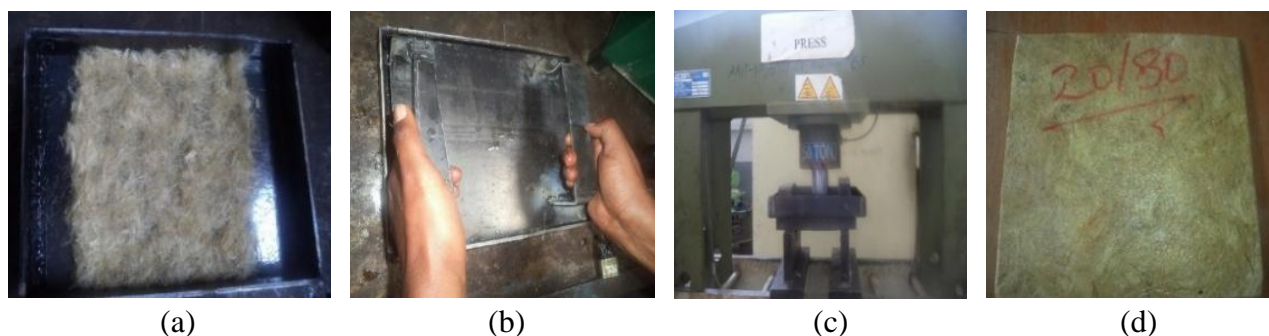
(a) Mold plate, (b) mold plate with cover frame.
